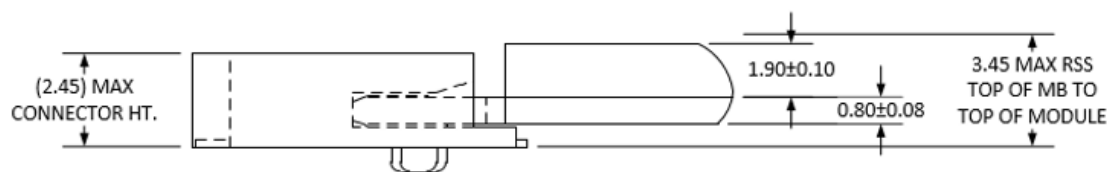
S5- Stack-up Top Mount Single-sided Add-in Card for 2.00 Maximum Top-side Component Height and with Higher Clearance above Motherboard
